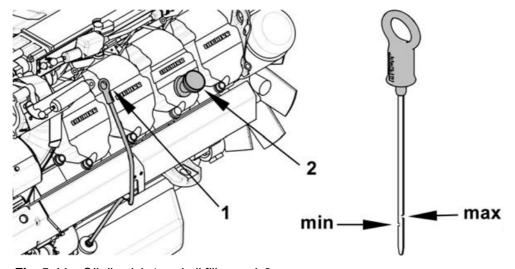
Oil dipstick 1 and oil filler neck 2
